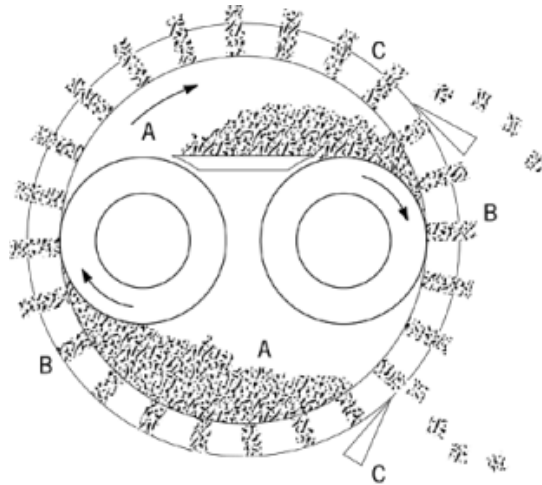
Operating principle of a common design of pellet mill: A, loose material is fed into pelleting chamber; B, rotation of die and roller pressure forces material through die, compressing it into pellets; and C, adjustable knives cut pellets to desired length. Courtesy of California Pellet Mill Co.
